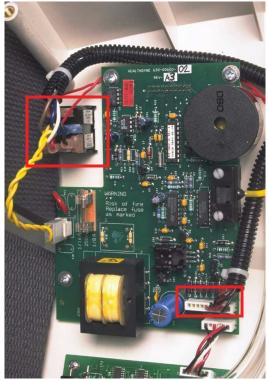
FIGURE AA: POWER SWITCH AND MAIN PCB J1 LOCATION
